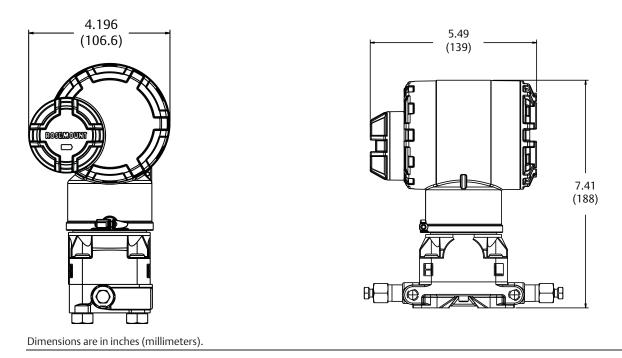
Rosemount 3051 Wireless Housing with Coplanar Flange
